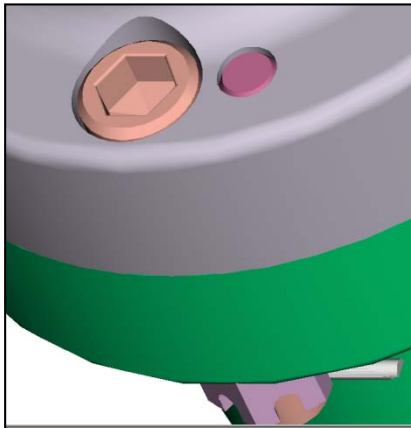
Socket Head Cap Screw and Slotted Hex Nut
